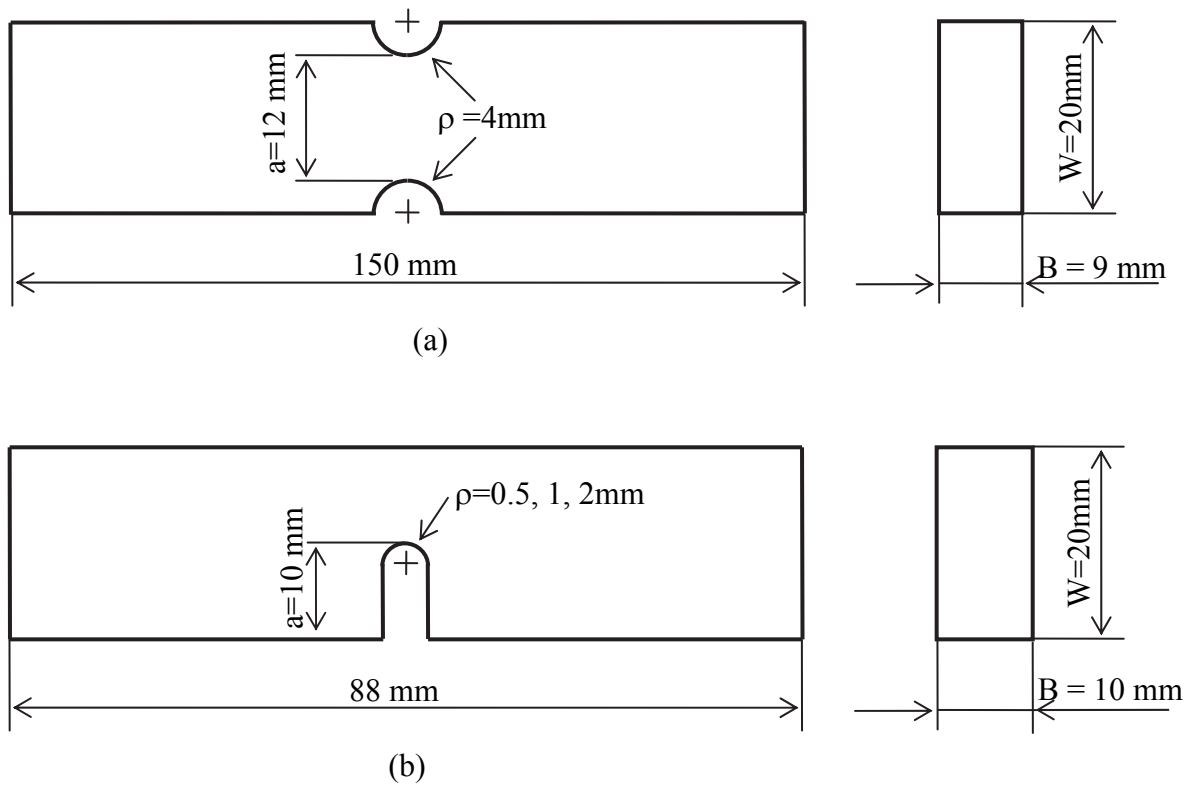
(a) Double Edge Notch Tension (DENT) specimens and (b) Single Edge Notch Bending (SENB) used in the tests
